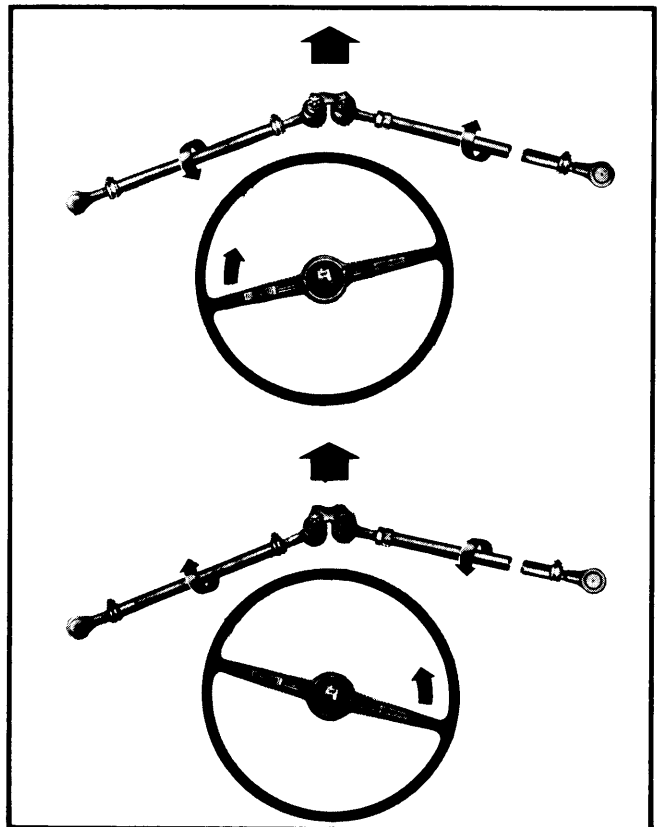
Direction of Tie Rod Rotation to Align Steering Wheel (Type 1 Only)
